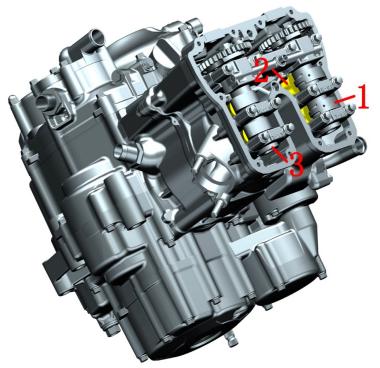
CYLINDER HEAD		Adjust valvo clearance	CHK	Ø
